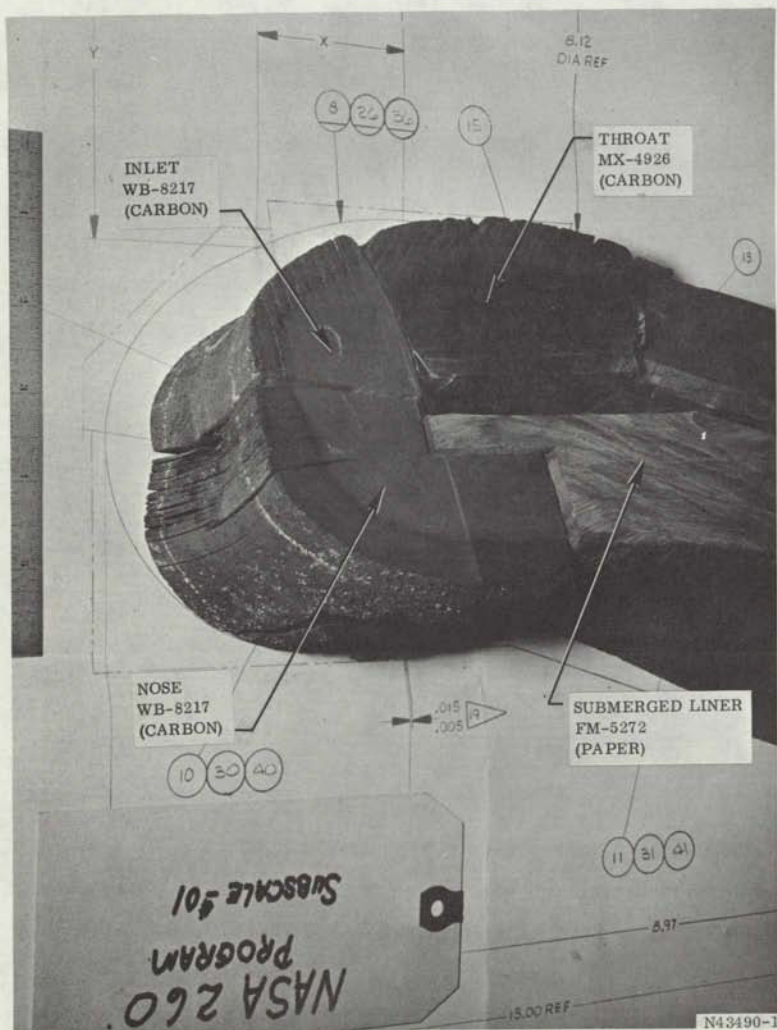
Nozzle No. 1 Submerged Liners Sectioned at Plane 2-3
